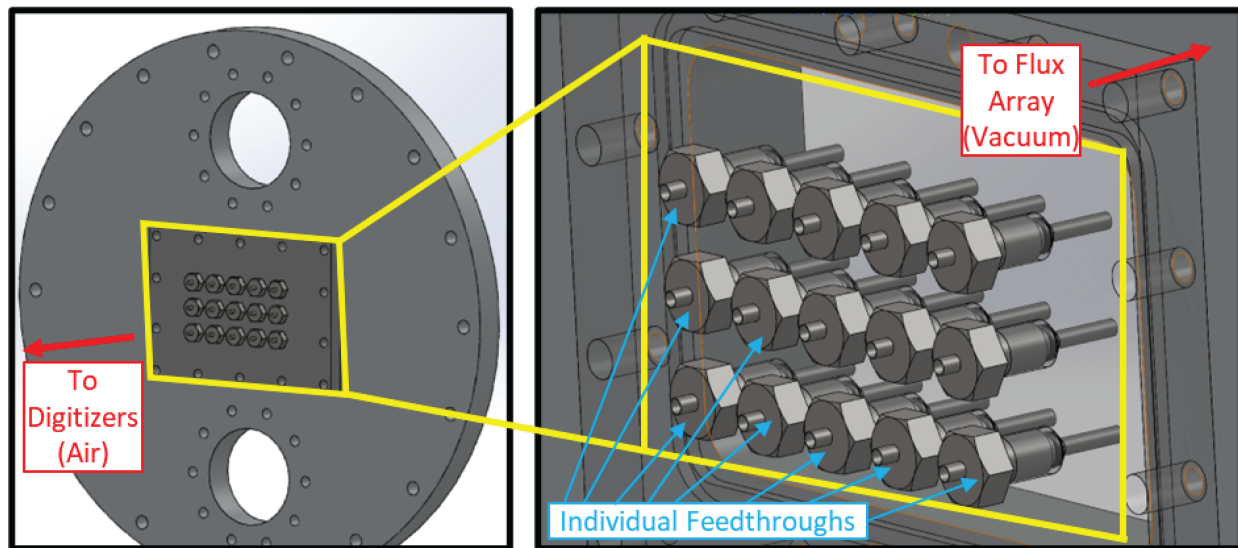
The flange designed for the second flux array. Instead of one vacuum seal that contains all the wires, this flange had multiple separate vacuum seals for each row of the array, such that one array row could theoretically be removed and replaced without breaking the feedthroughs of the other rows.
